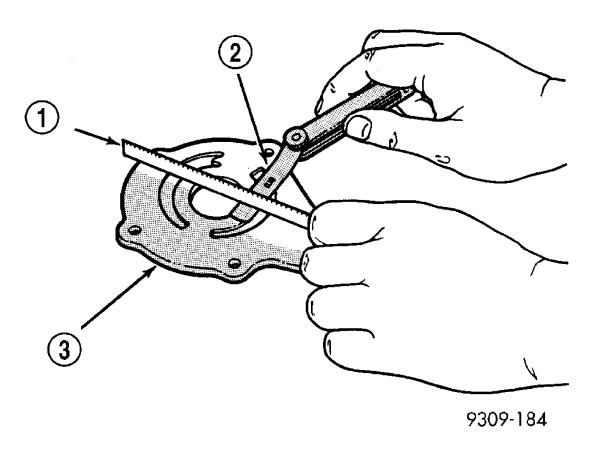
Checking Oil Pump Cover Flatness Courtesy of CHRYSLER LLC
